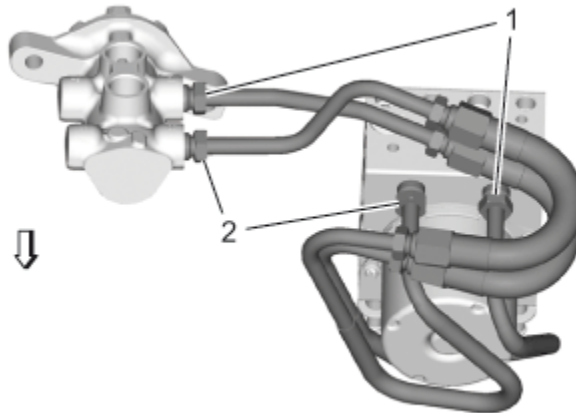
Brake Pressure Modulator Valve Primary And Secondary Pipe Fitting
